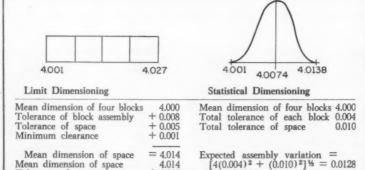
Statistical dimensioning of four-block assembly by retaining individual block tolerances, or retaining total assembly tolerance, in.; t=individual component tolerance, in.
